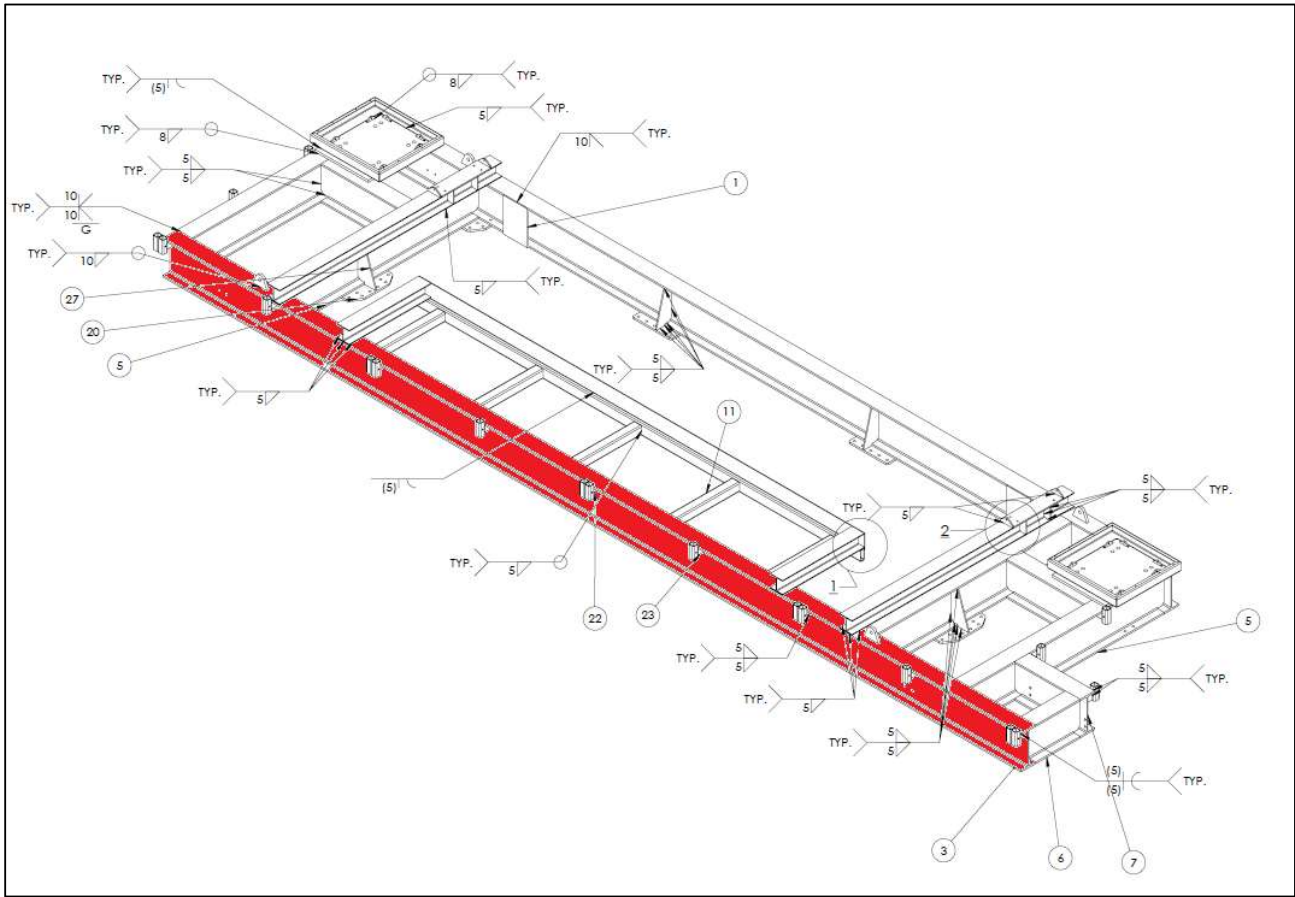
Isometric of platform, from stoplog lifter's drawing 6039-2D304 REV 0 Deck Platform Welded Assembly. Beam to which track must be attached is shown in red.
